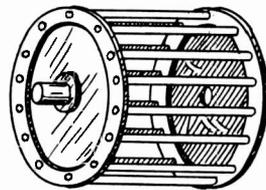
Typical rotor of an induction motor, made up of copper rods which are riveted and soldered at each end to circular copper discs mounted on the rotor shaft. Before assembly, laminated sheet steel discs having slots for the copper rods are placed on the shaft inside this "squirrel-cage"; this steel core serves to reduce the reluctance of the path for the rotating magnetic flux and for the fluxes set up by the many shorted loops in the rotor.
